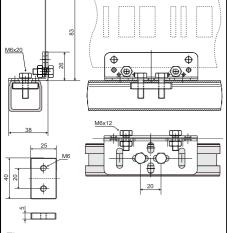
Mounting bracket for C profile straight section (WCS-MB2)
